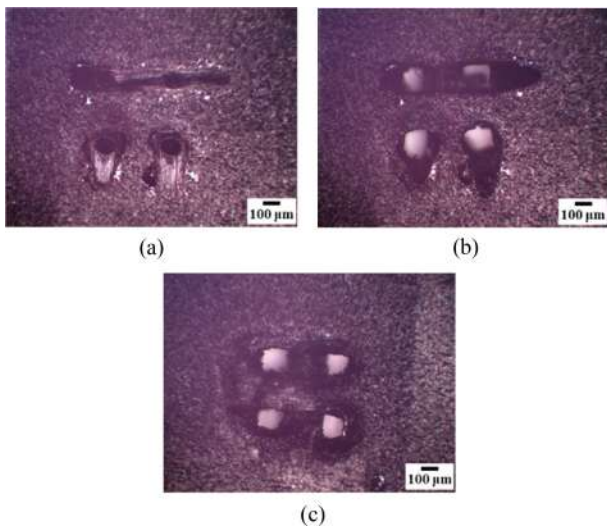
Multi-processing of 4 square shapes with multi-tool by hybrid machining: (a) After laser-pre-processing (80% power, 200 repetitions); after EDM post-processing (125 V, 47 nF) (b) Front view, (c) Backside view
